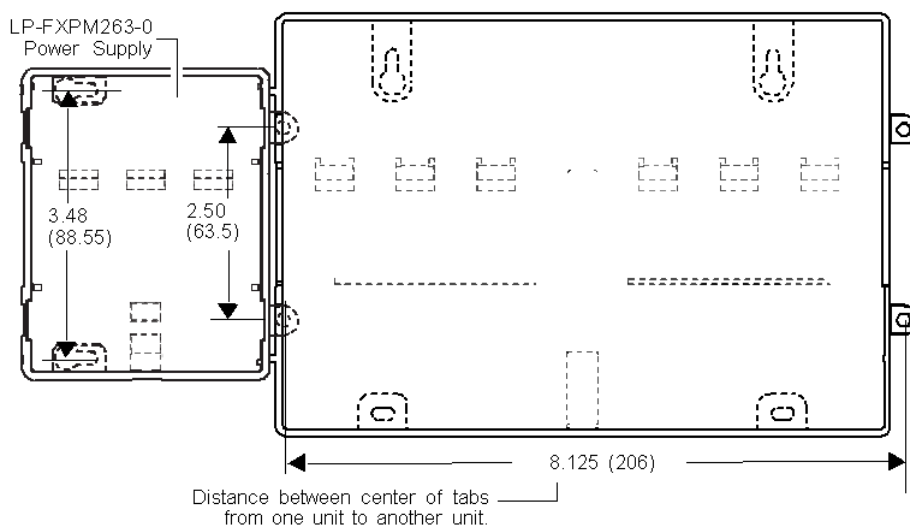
FX70 Tab Mounting with Power Supply Attached Dimensions, in. (mm)
